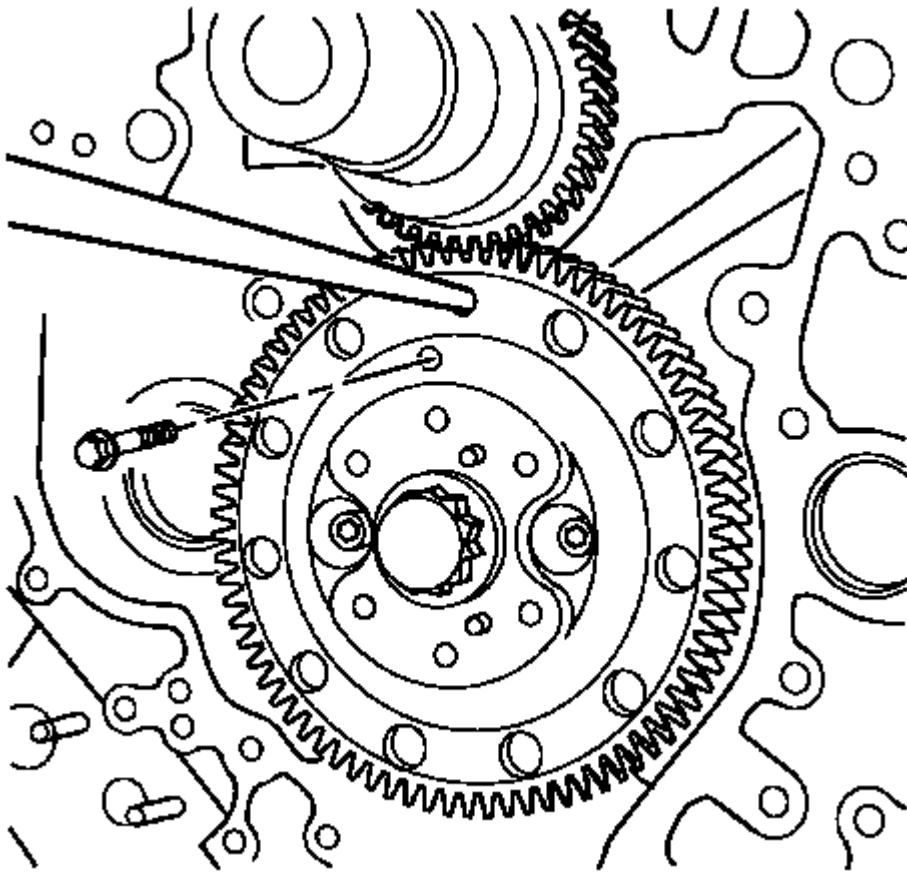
Using Exciter Ring Bolt To Secure Spring Tension
